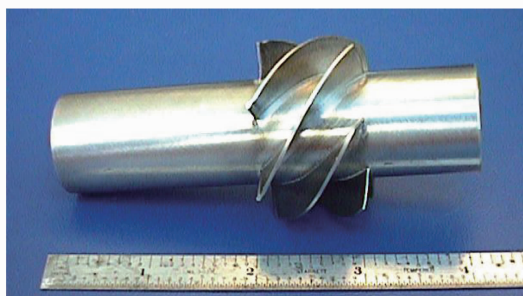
LC IN-625 fins built on pre-machined 316L stainless steel shaft
